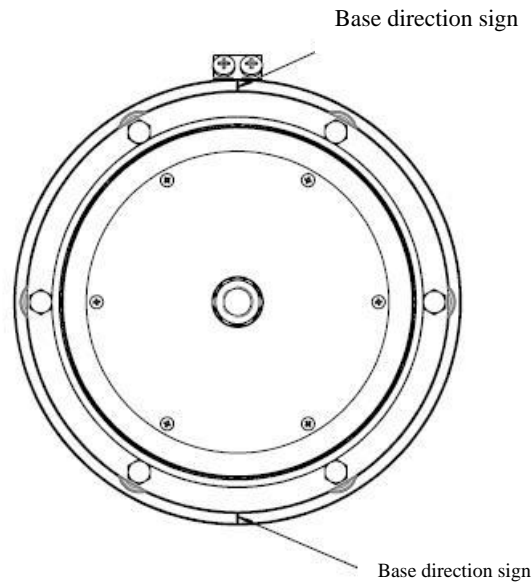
Installation Diagram of In-pavement Lighting Fixture
